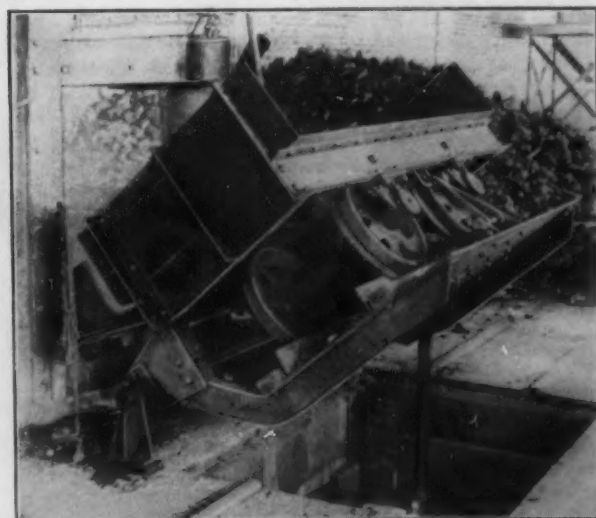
A Whiting Car Dumping Charging Machine for Large Cupolas.
